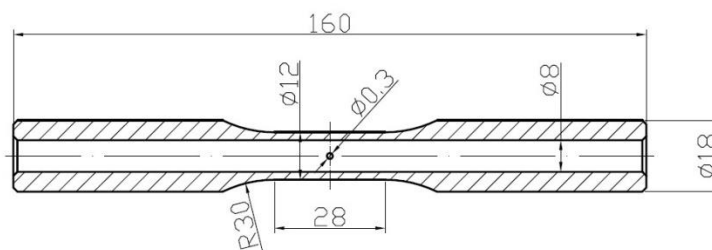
Hollow specimen with a small hole drilled into the gauge length wall.
